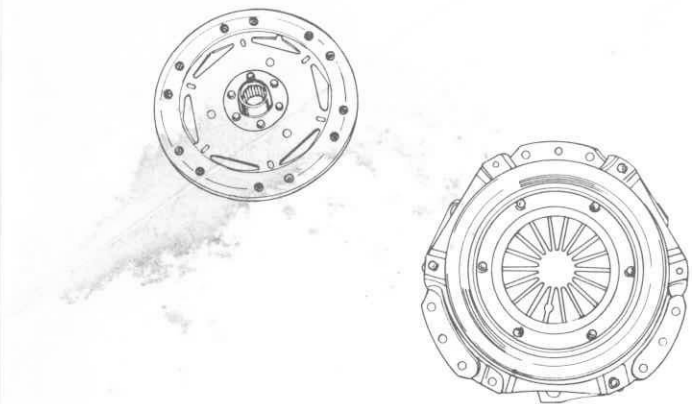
1 The clutch disc or drive plate on the left and the cover assembly on the right
